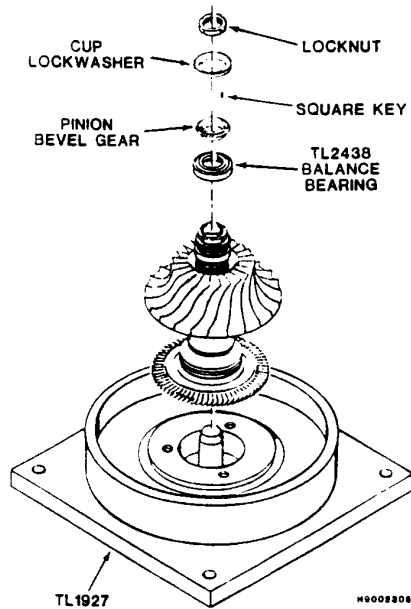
Installation of TL2438 HP Turbine Shaft Balance Bearing on HP Shaft
